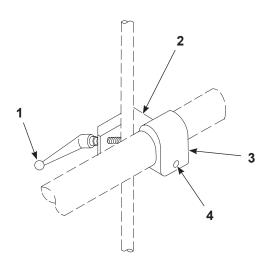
Gun Bar Mounts for Tube-Mount Guns
